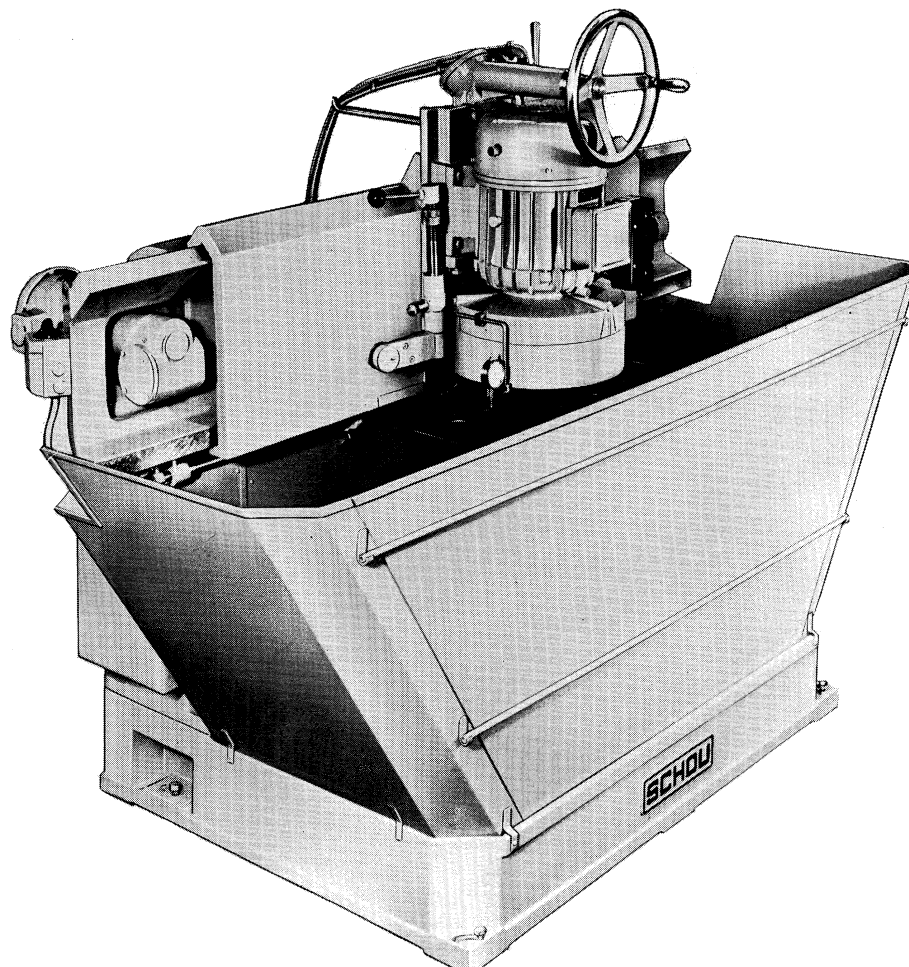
Automatic Surface Grinding Machine. Made by Schou and Company, Copenhagen, Denmark.
